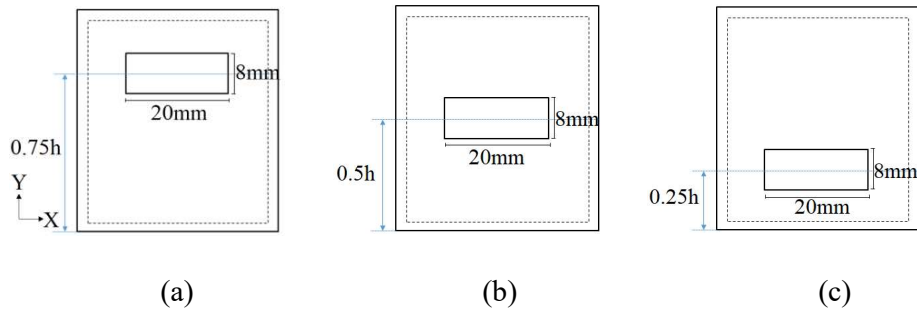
Opening dimensions for (a) top, (b) center, and (c) bottom.
